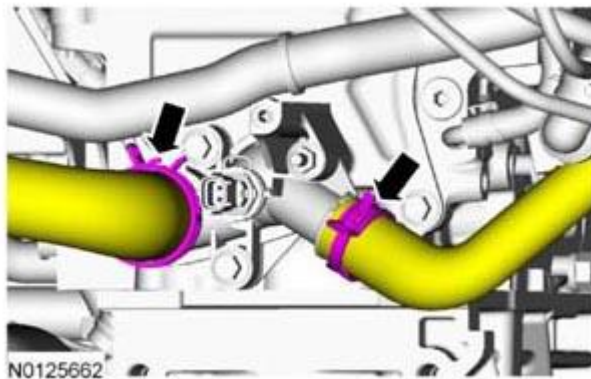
Locating Coolant Hoses From Coolant Outlet
